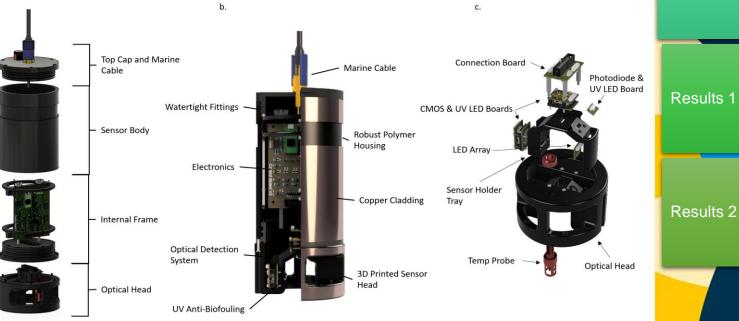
Finalised design of the sensor. A.) Exploded view of sensor sections. B.) Labelled features of the sensor. C.) Exploded view of the internals of the optical head with labelled components
